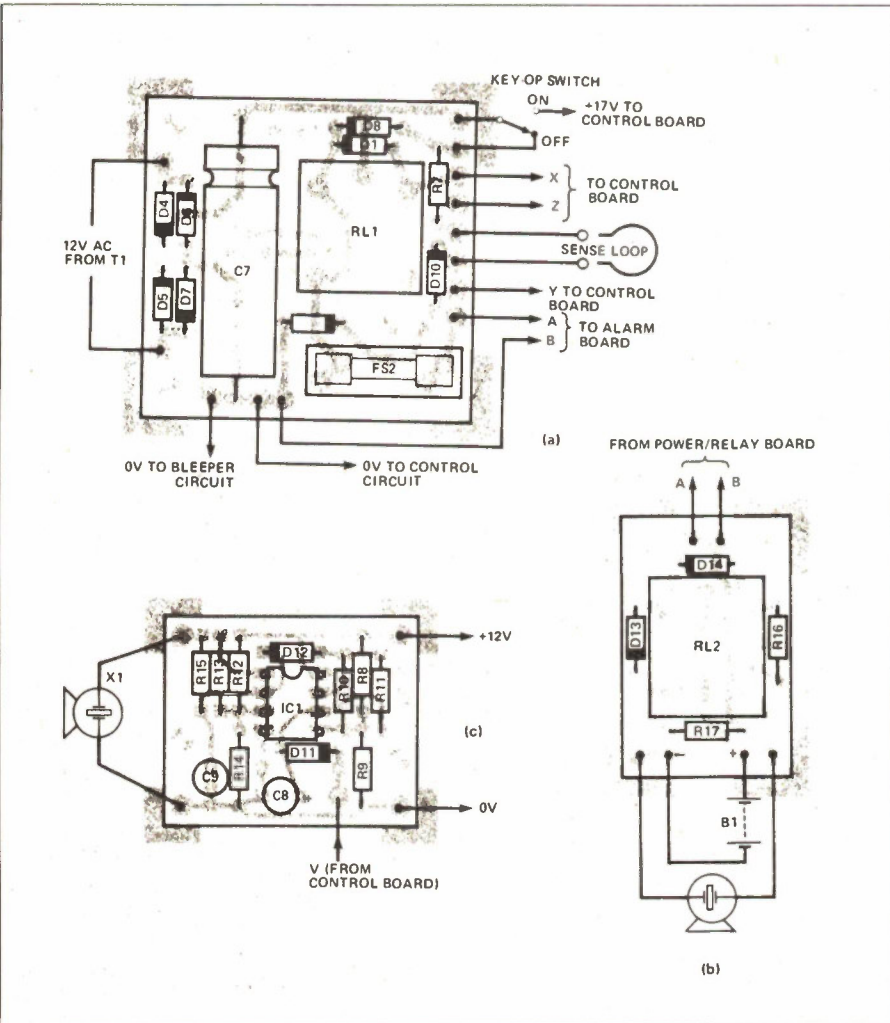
Component overlays for the expanded Burglar Buster. (a) The power and relay board. (b) The bleeper board. (c) The alarm board.
